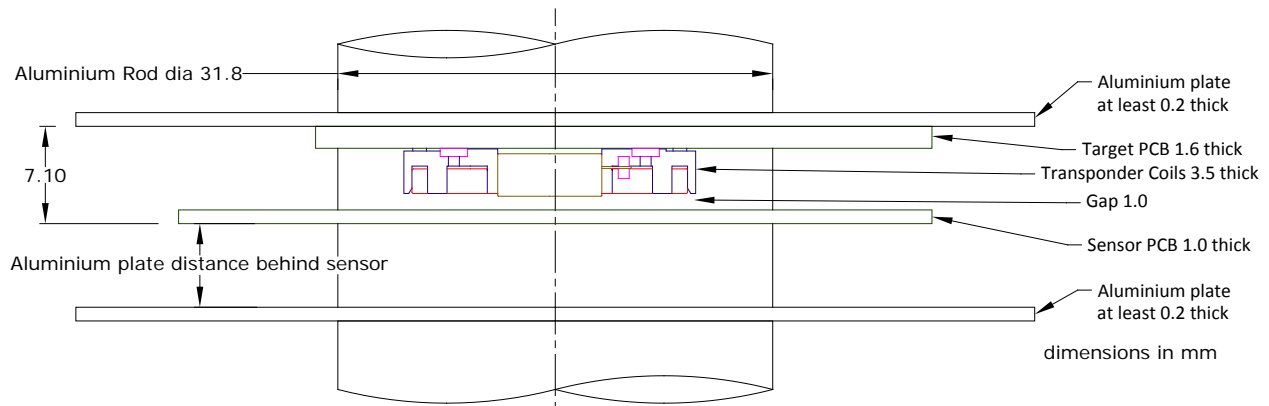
Between Aluminium Plates, Target Mounted to Aluminium, With Rod through Centre
